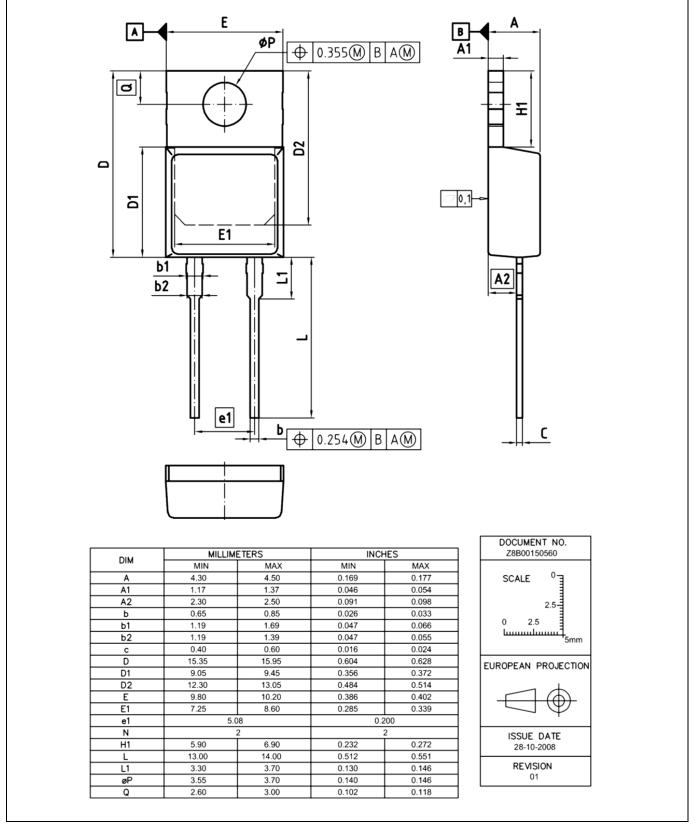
Outlines of the package PG-TO220-2, dimensions in mm/inches
